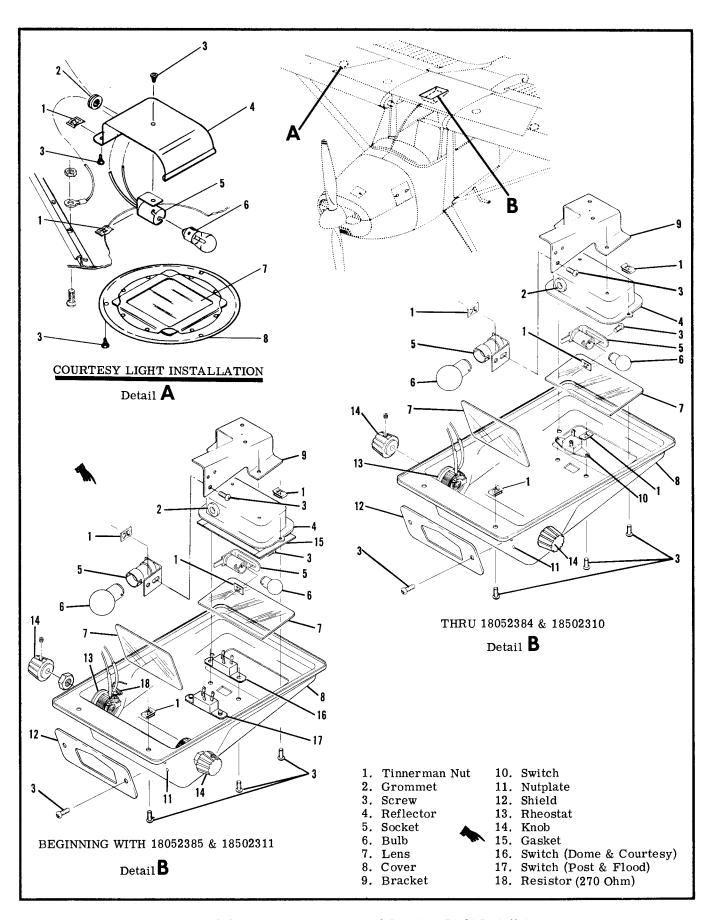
Instrument, Dome and Courtesy Light Installation
